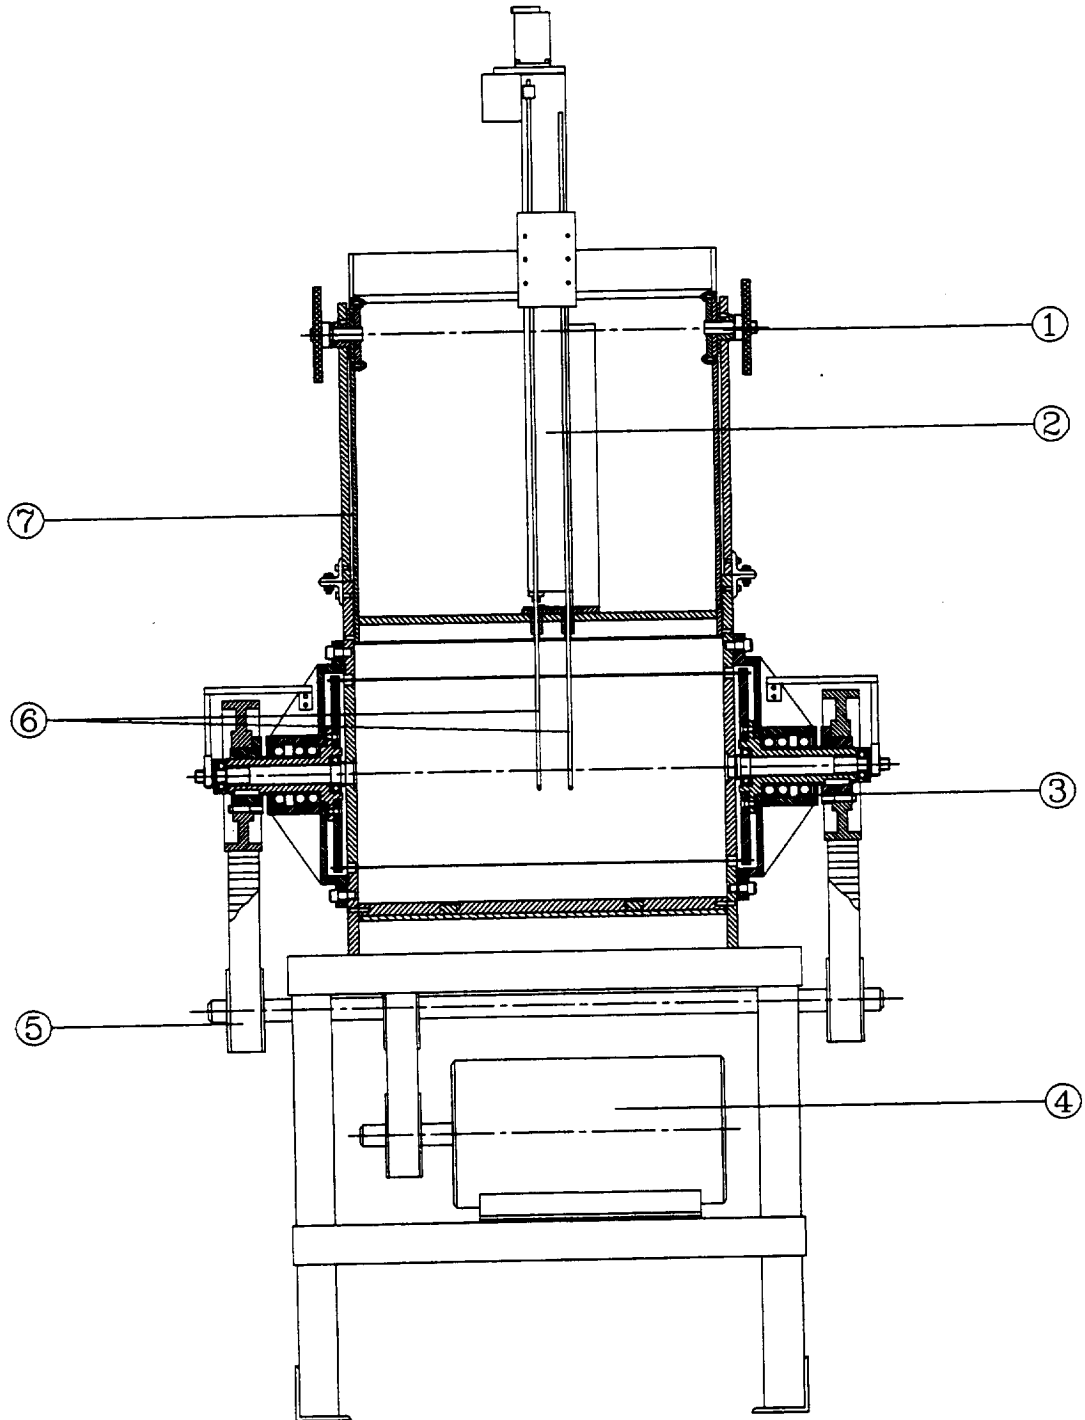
Section of convex wall assembly and wake generator. 1-locking wheel assembly; 2-probe traversing assembly; 3-wake generator; 4-motor; 5-driving system for wake generator; 6-probes; 7-convex wall assembly
